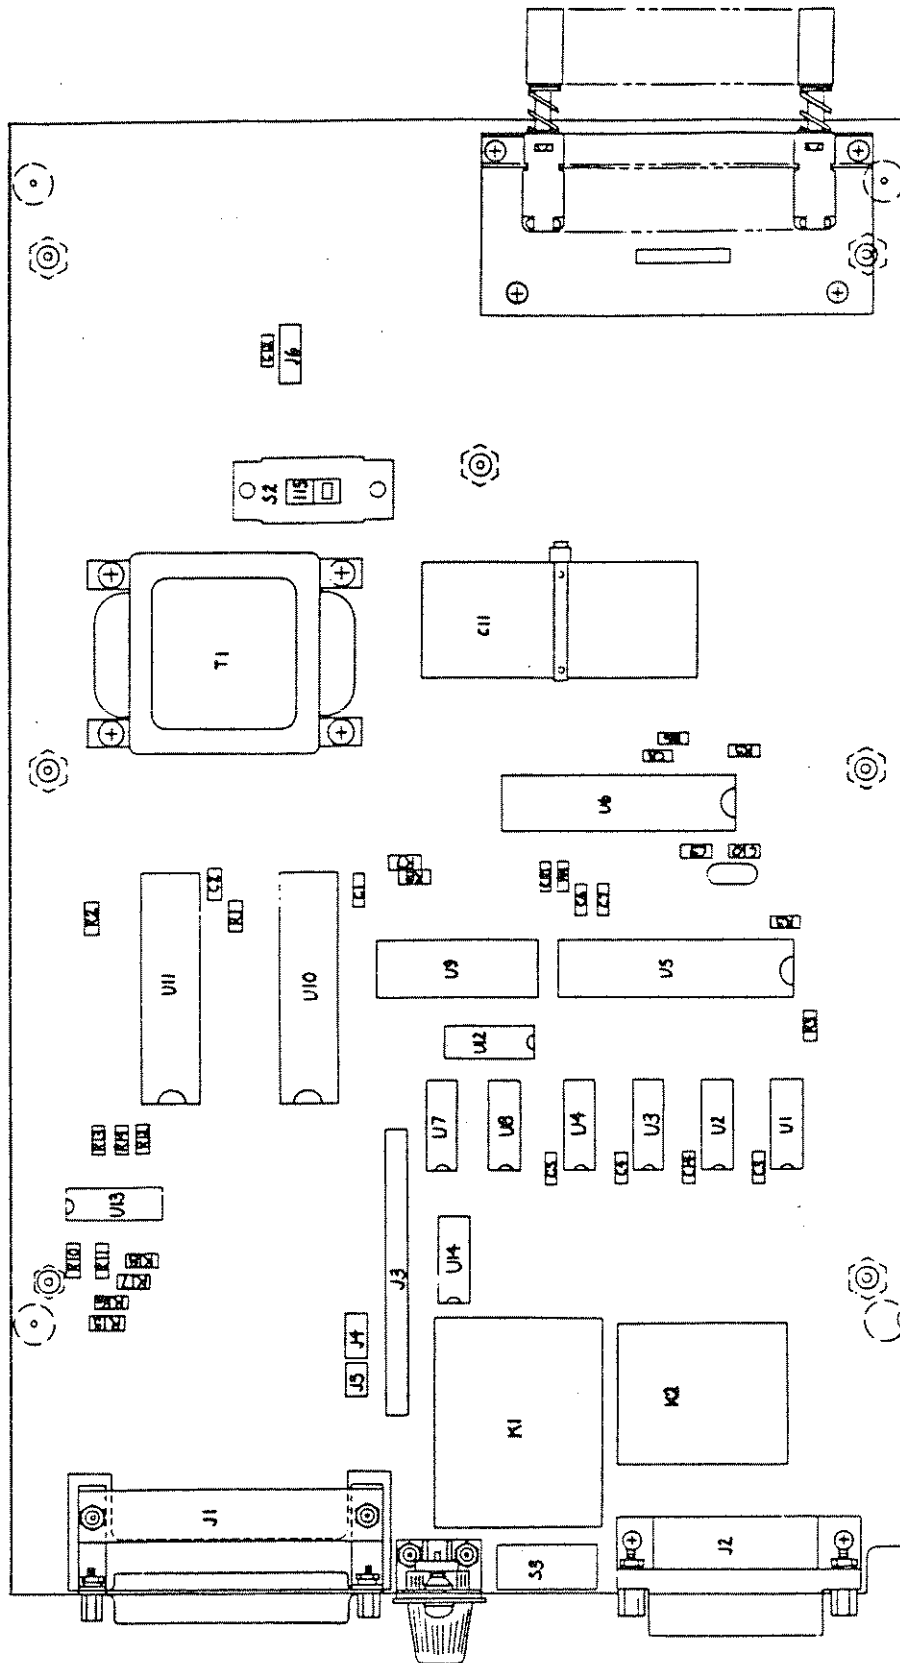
Multiplexer Board (D27348-1) and Multiplexer/488 Interface Board (D27348-2), Parts Location
